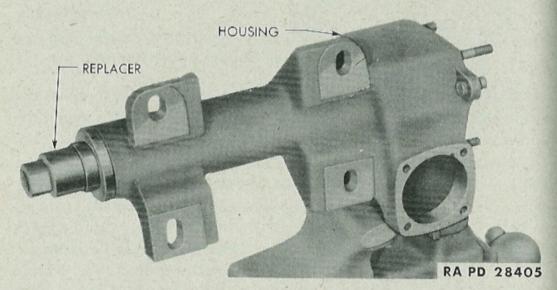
Installing Roller Shaft Oil Seal with Replacer 41-R-2396-100
